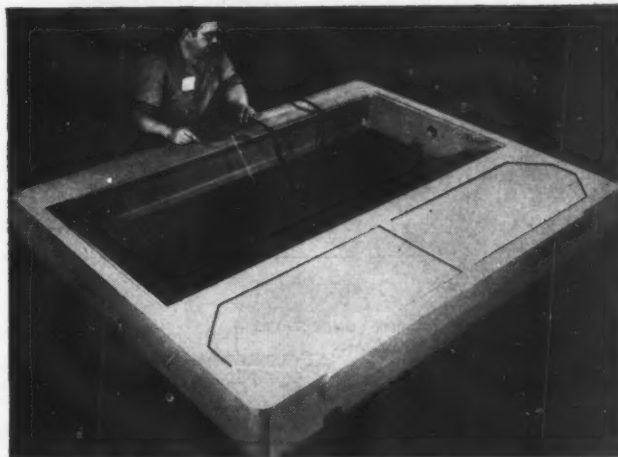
The new welded steel base for 150 KW machine shown in Fig. 1.
